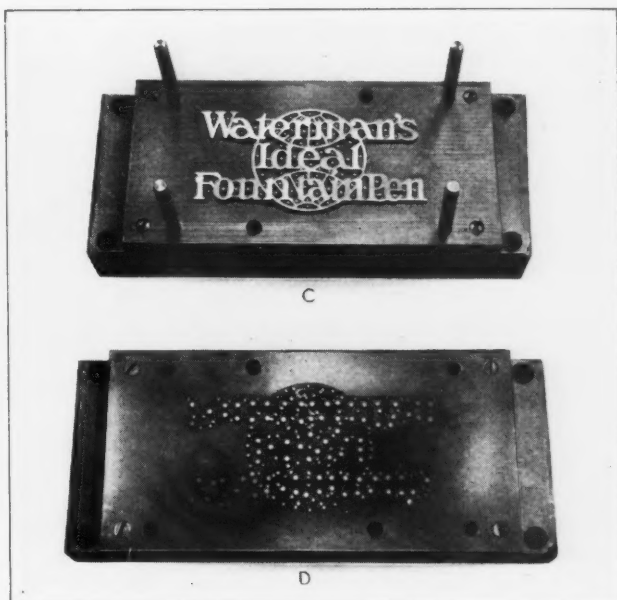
Die Employed in Blanking the Part Shown at A, Fig. 1
